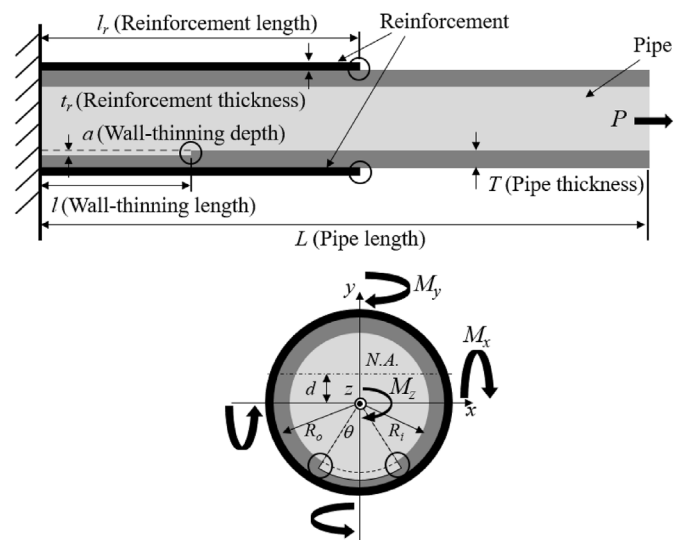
Schematic illustrations of a wall-thinned pipe with reinforcement.
